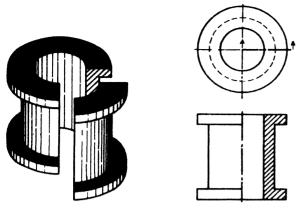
HALF-SECTION DRAWING OF SPOOL
